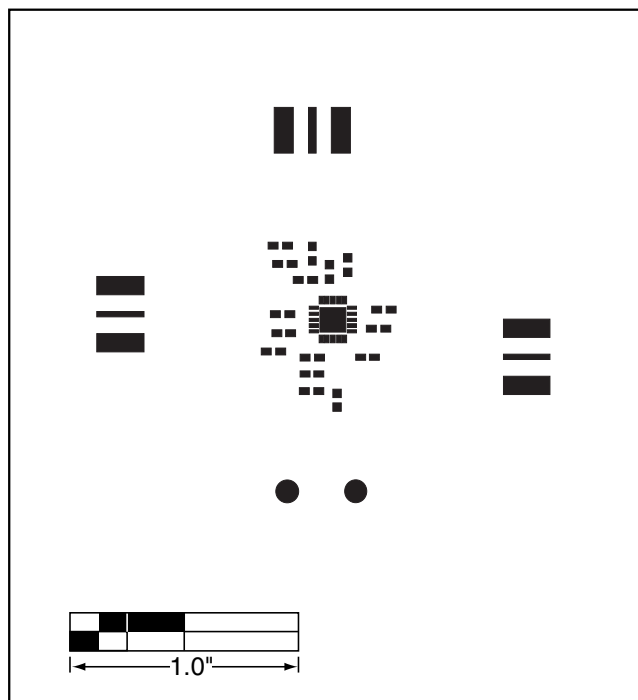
MAX9989/MAX9990 EV Kit PC Board Layout—Top Soldermask
